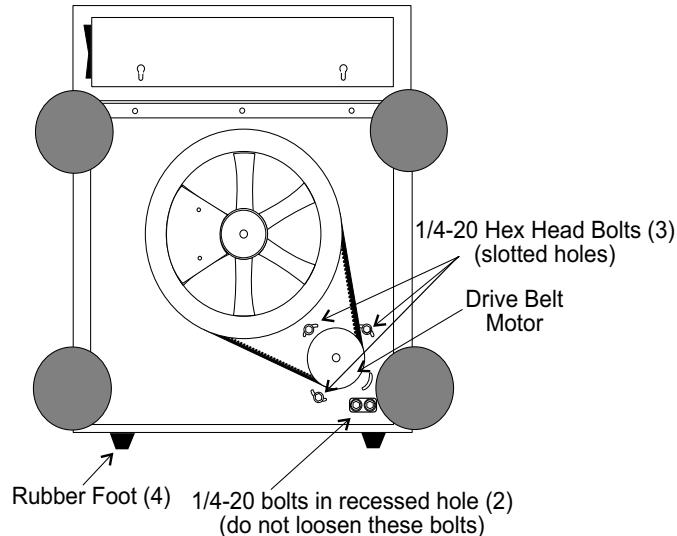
Underside of shaker cabinet with bottom cover removed
